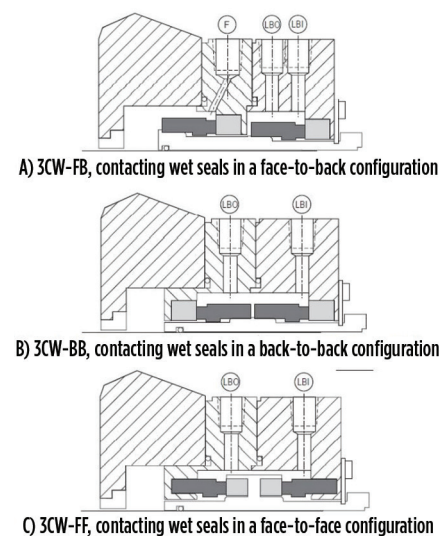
Mechanical seal Arrangement 3 per API 682.¹
